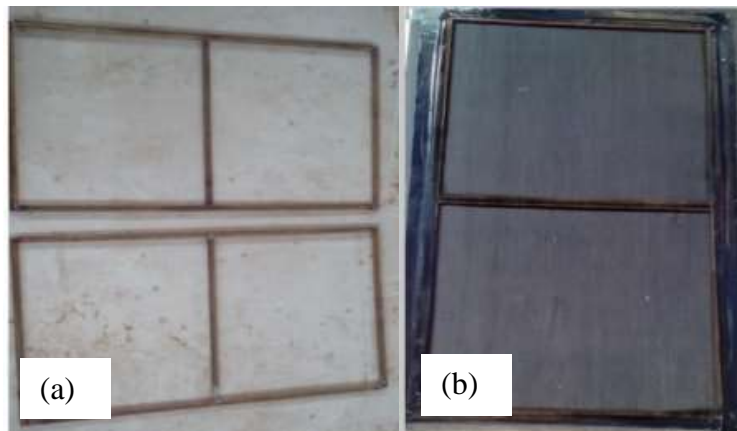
10. Prepared Mold(a) pairs of molds, (b) waxed mold
